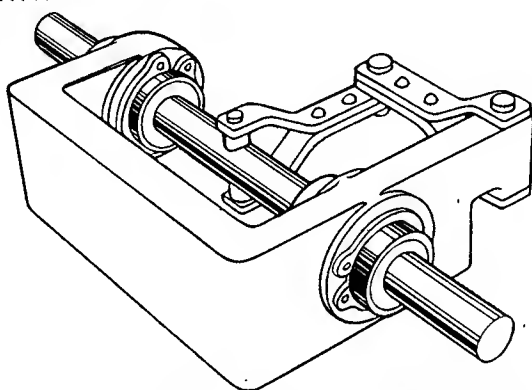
SINGLE SHAFT WITH LINKAGE GUIDE
